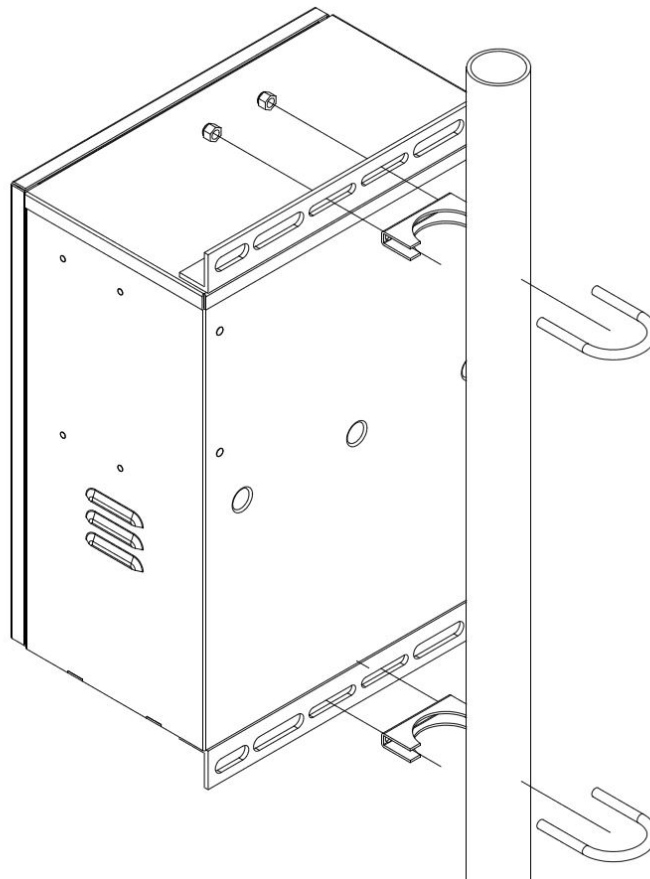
M-STYLE CONTROL/BATTERY ENCLOSURE POLE MOUNTED INSTALLATION
